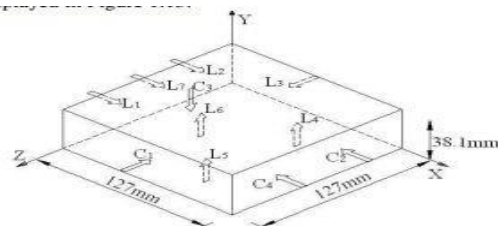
Workpiece-fixture configuration of 3-3-1 layout with additional clamp
